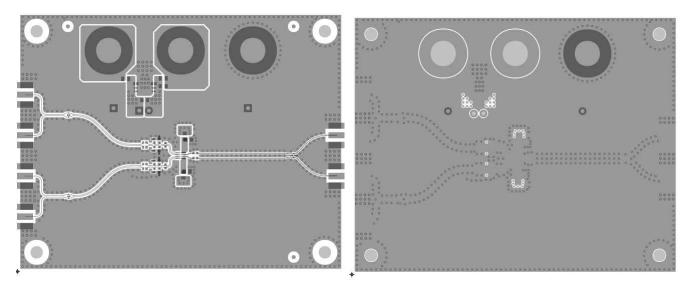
DS90LVRA2 EVM PCB Layout – Layer 1 Figure 2-4. DS90LVRA2 EVM PCB Layout – Layer 2 (Top Side)
